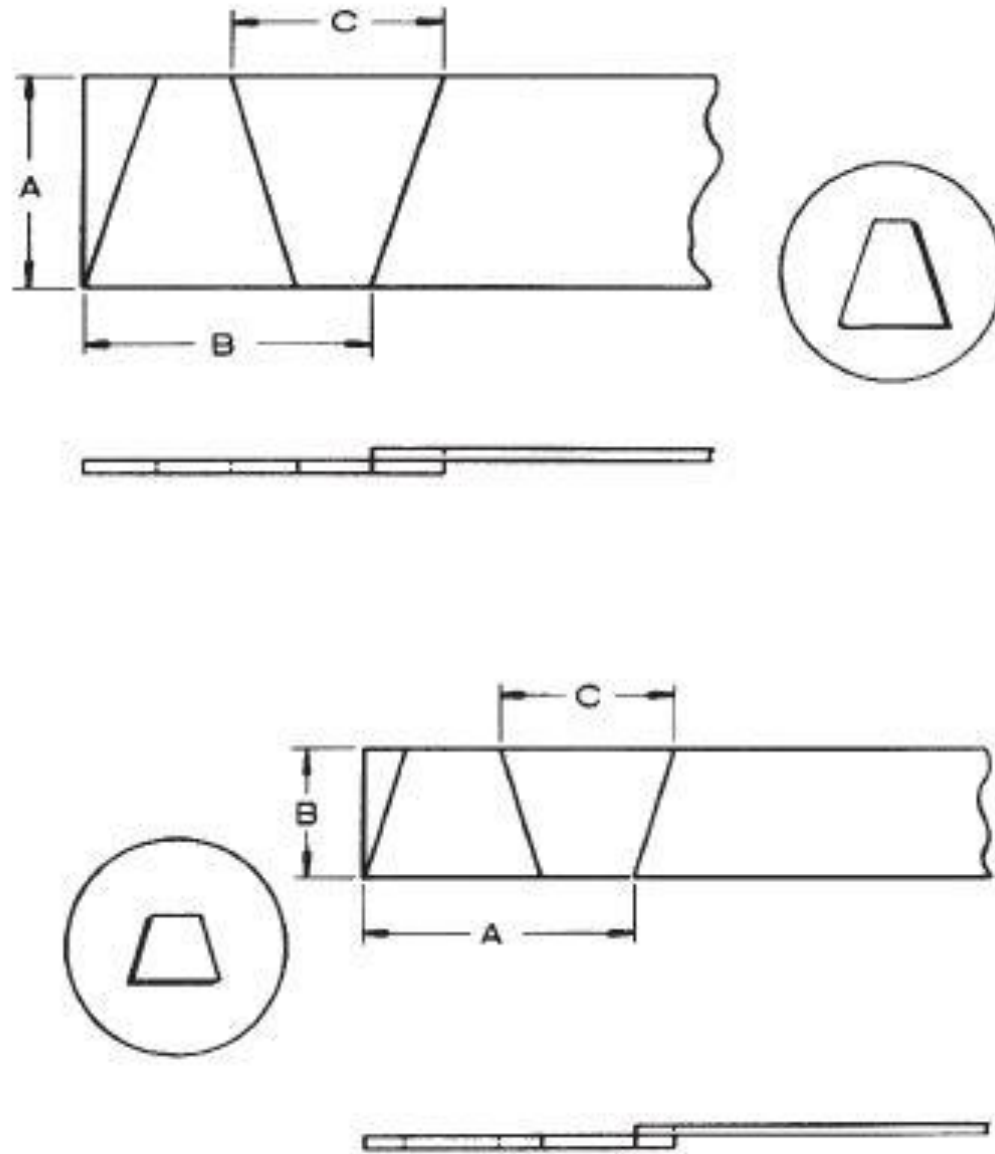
Trapezoidal blanks are sheared in a manner similar to acute angle triangular blanks.
